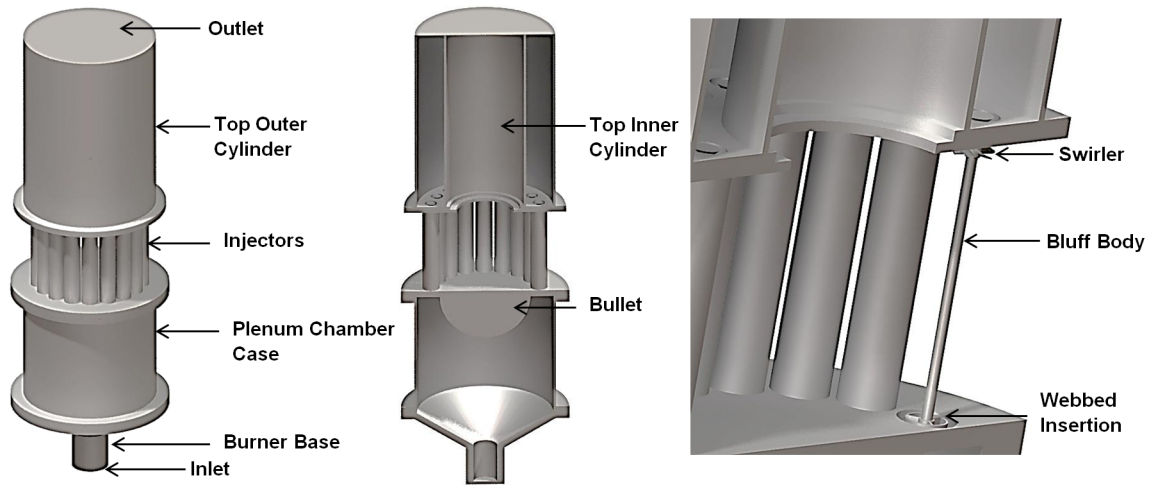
Full modified burner CAD side view (left), cut view (middle) and inner view of an injector (right).
